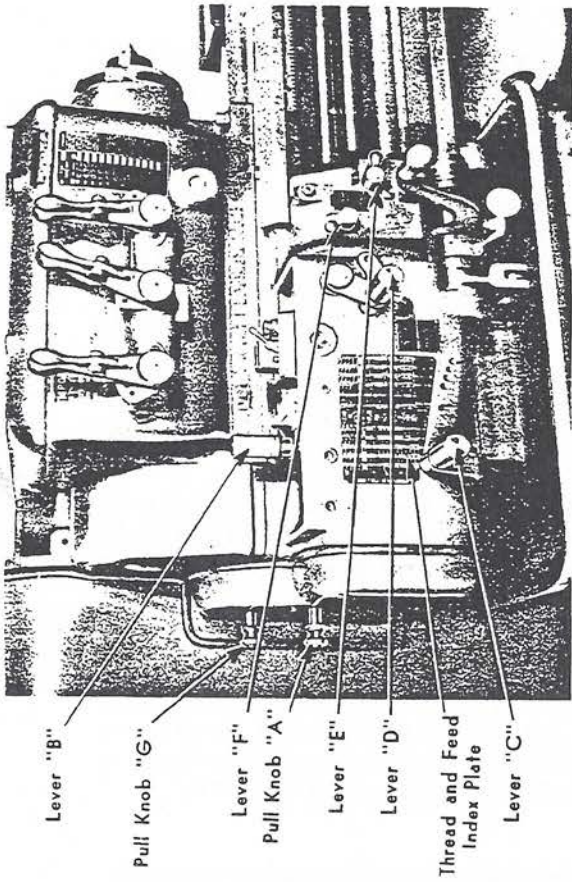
Head End View of Lathe Not Equipped With Reverse To Leadscrew
